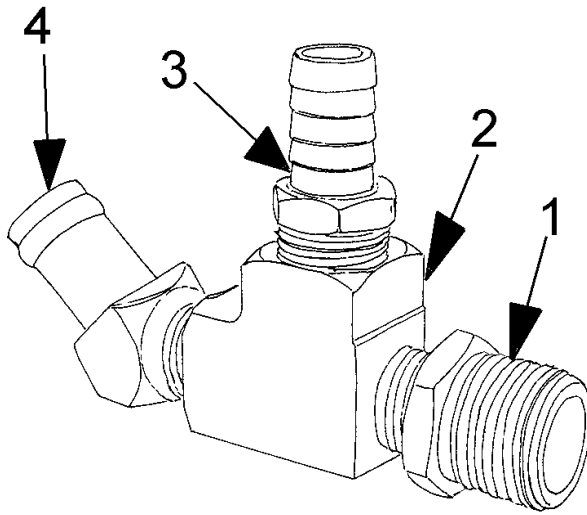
Fittings for Heater Return Hose with Shut Off Valve
